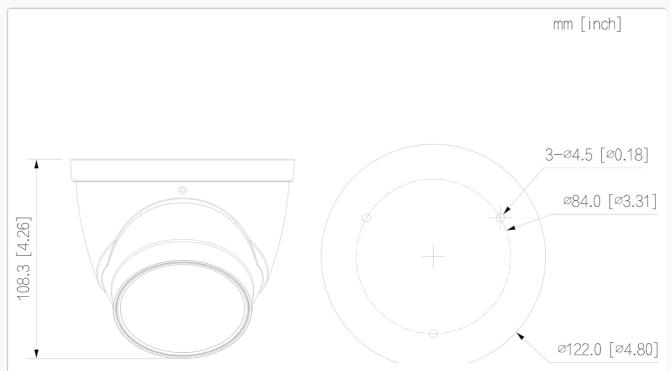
Technical drawing showing the dimensions and mounting hole pattern for the camera. Dimensions are provided in millimeters and inches.
